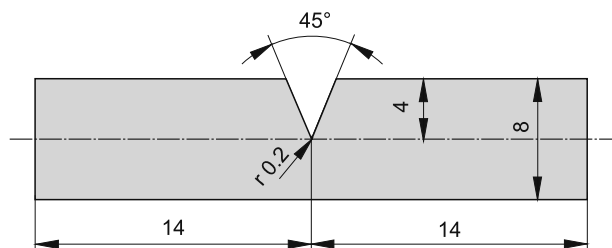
Shape and dimensions of the modified bending test (modified notch toughness test) specimen
